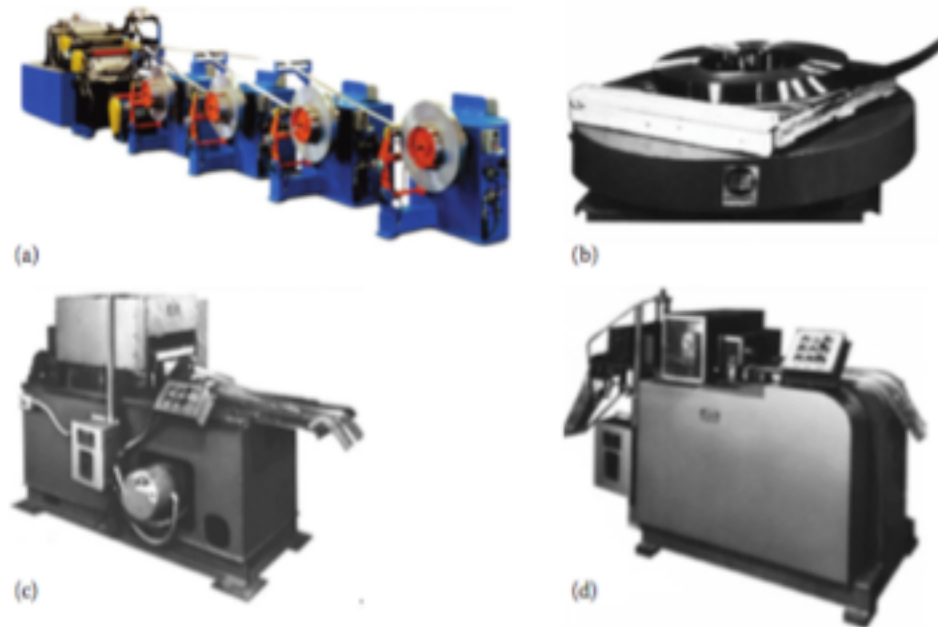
Strip expansion process equipment. (a) Lead-alloy strip caster: Multialloy caster produces fully edge-trimmed lead alloy strips; (b) Coil feeder: This machine feeds the coiled lead from the horizontal position; (c) Expander: Using a die, the expander produces controlled expansion, which results in the grid's diamond pattern and height; (d) Shaper: The shaper forms the lugs and accurately sizes the grid for height and thickness. A positive feed mechanism aligns and positions the expanded strip and a punch-and-die knocks out clean, reclaimable lead from the unexpanded center portion of the strip. (From MAC Engineering. Available at <http://www.mac-eng.com>; Battery Technology Solutions Inc. Available at <http://www.batechsol.com>.)
